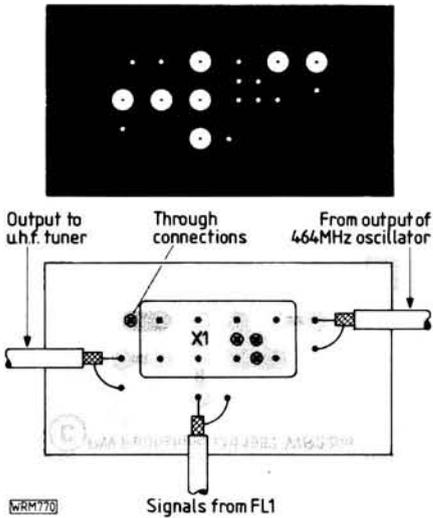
Double-sided track pattern (shown full size) and component overlay of mixer module
